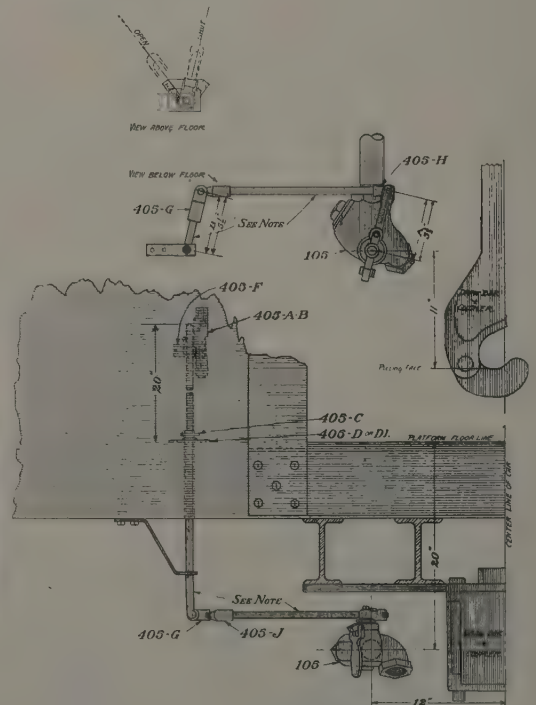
Method of Operation of No. 105 End Valve from Car Platform.
